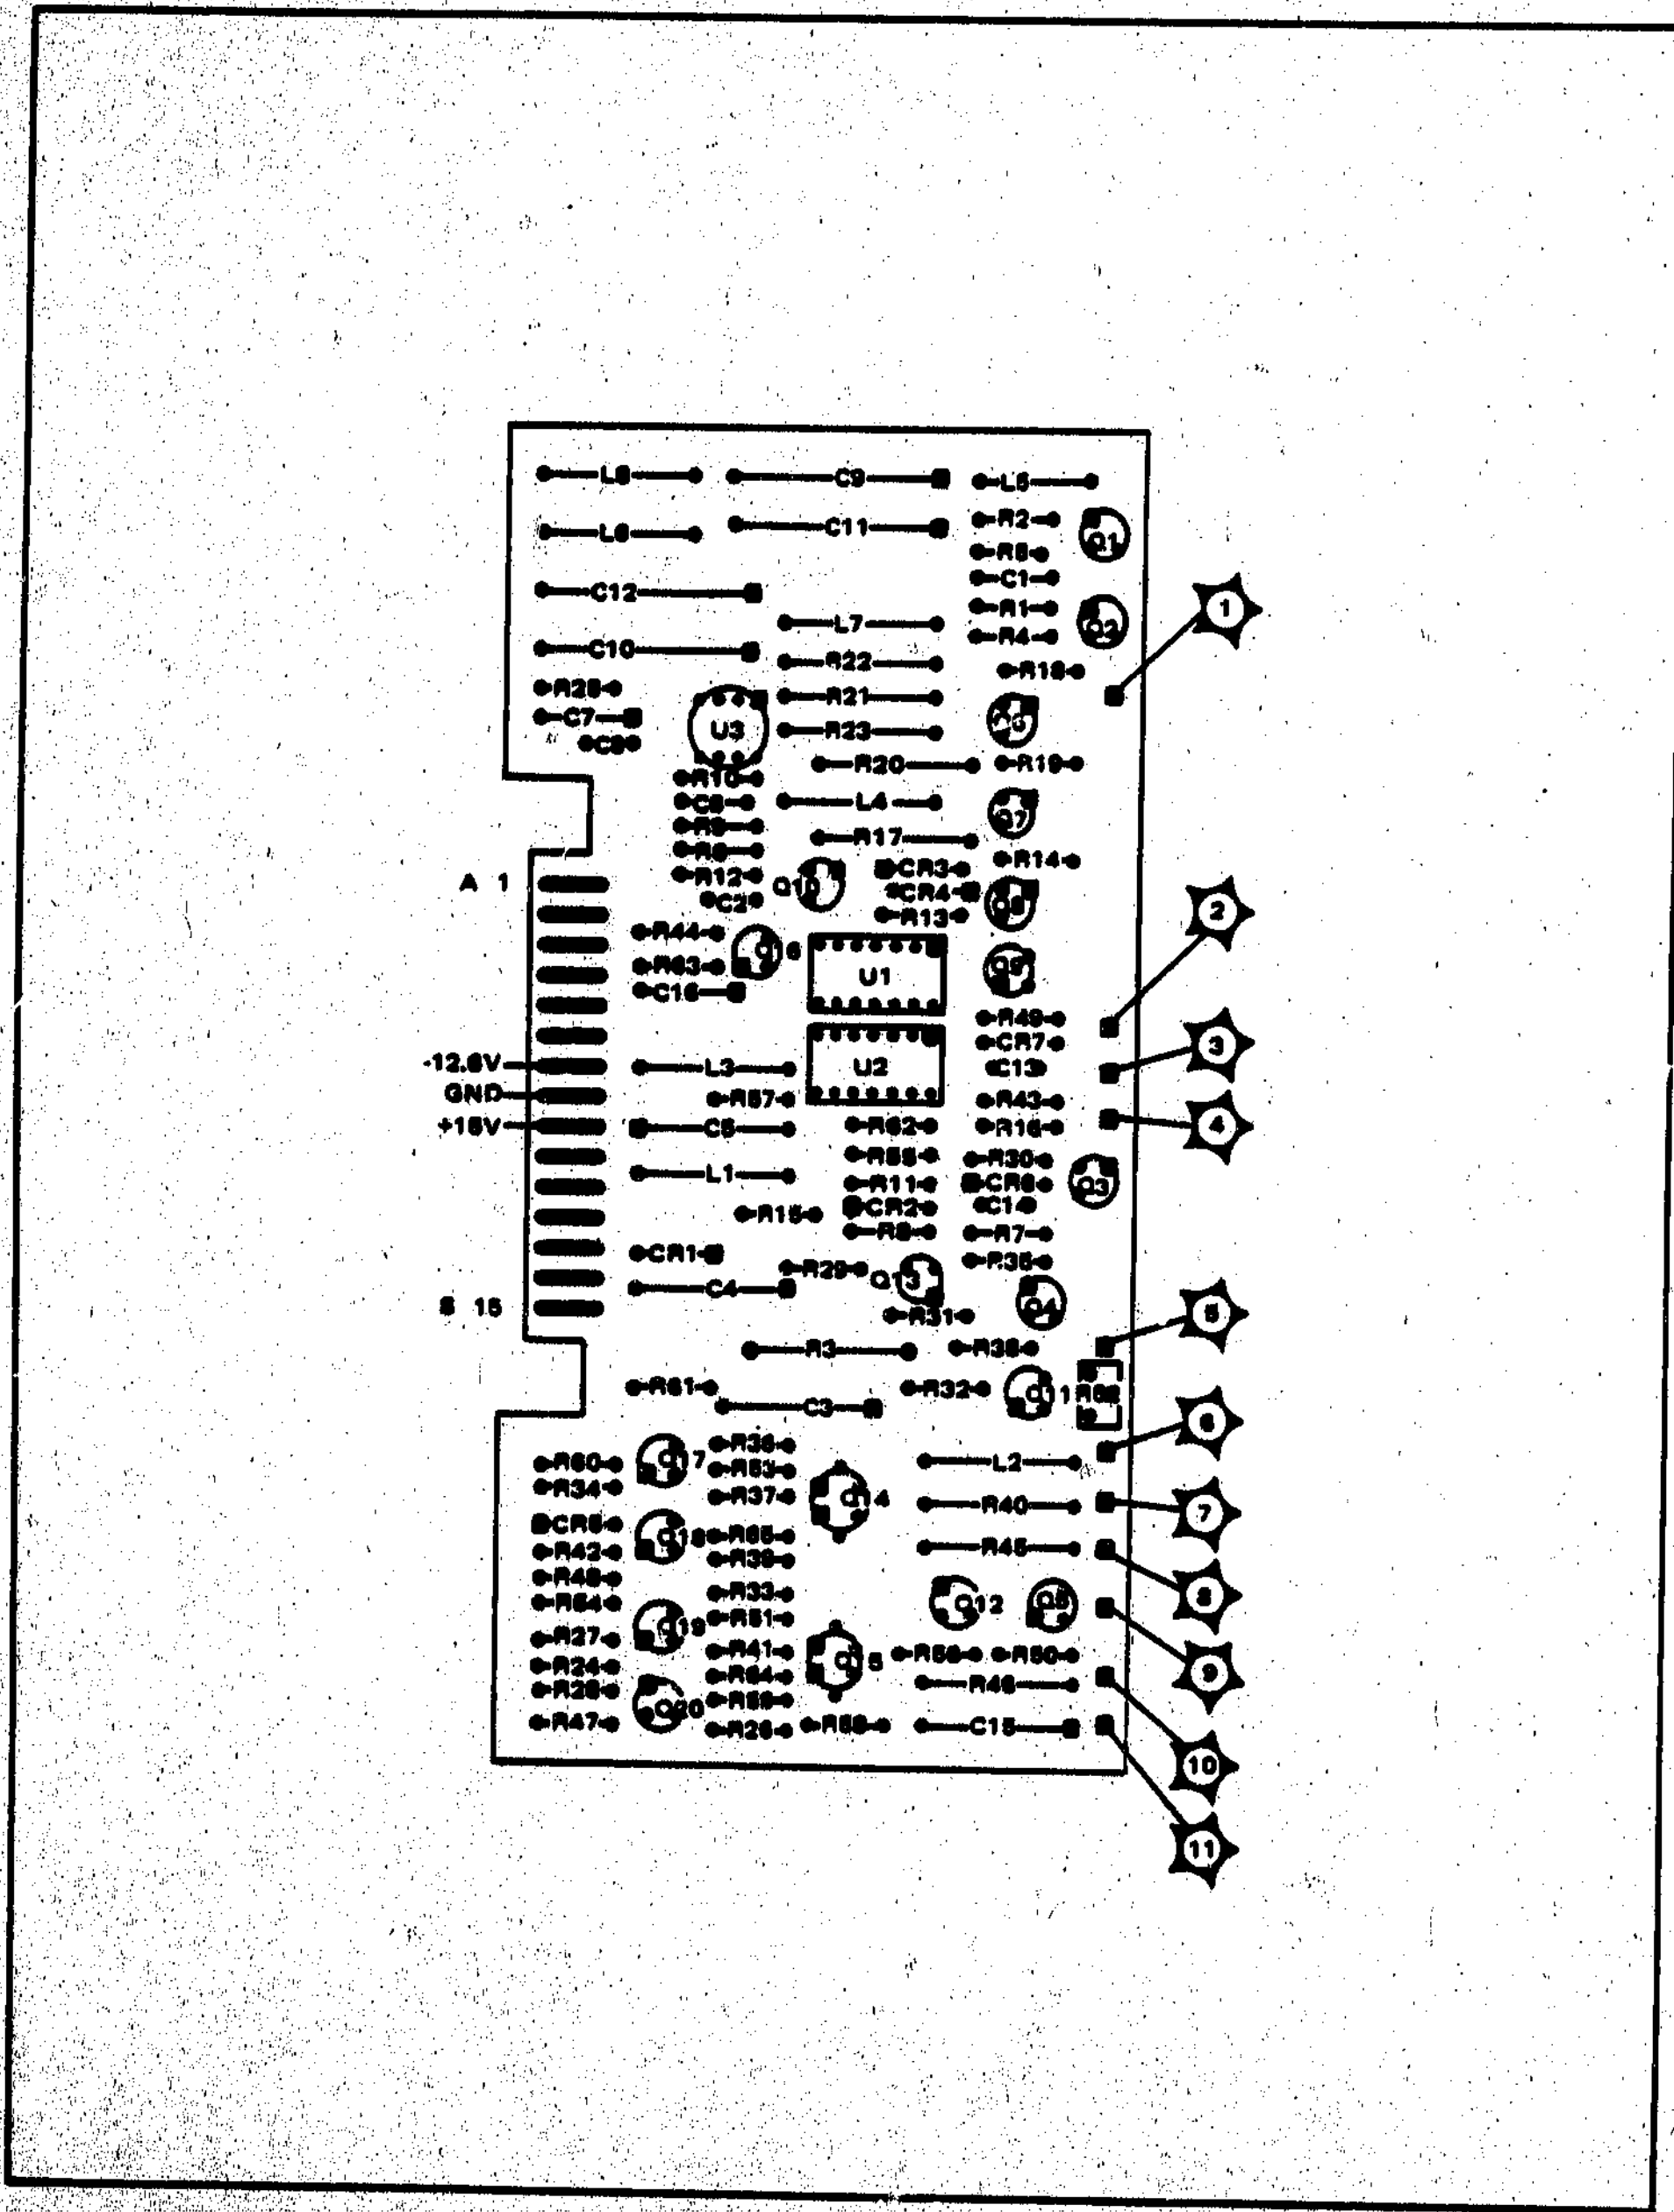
A10 Modulator Driver, Parts Location (CHANGE 2)
